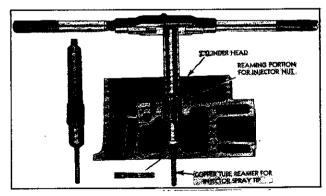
Reaming Copper Tube in Cylinder Head for Injector Body Nut and Spray Tip with Tool J-1231-1.
